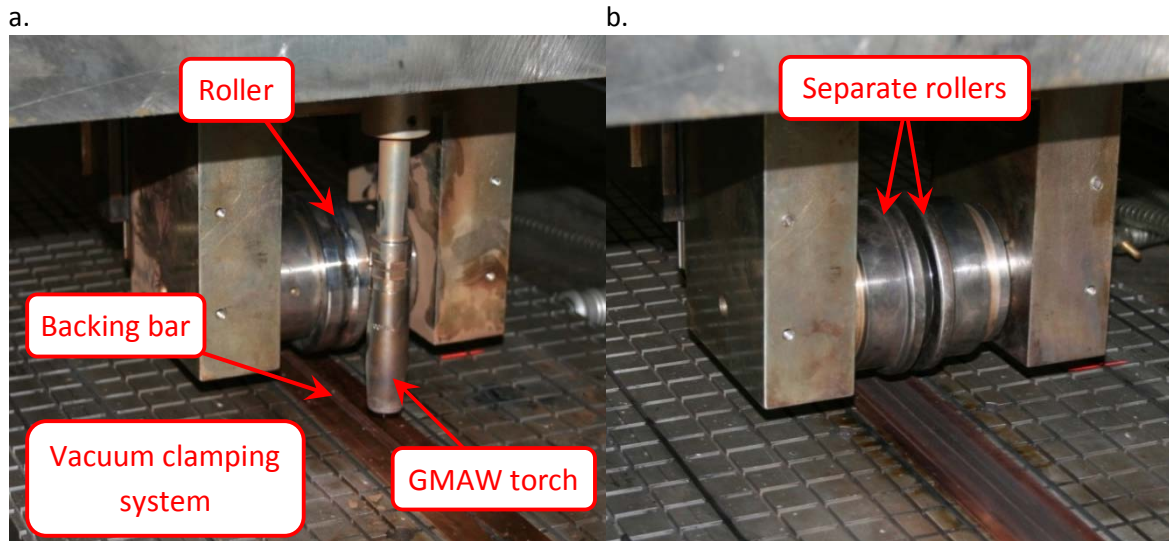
Front views of the roller fork with: (a.) single roller with a circumferential groove to accommodate a weld seam, and a GMAW torch positioned in front the roller for *in situ* rolling, (b.) the torch removed and a pair of rollers (these designed for rolling the weld toes only), mounted on separate short axes.
